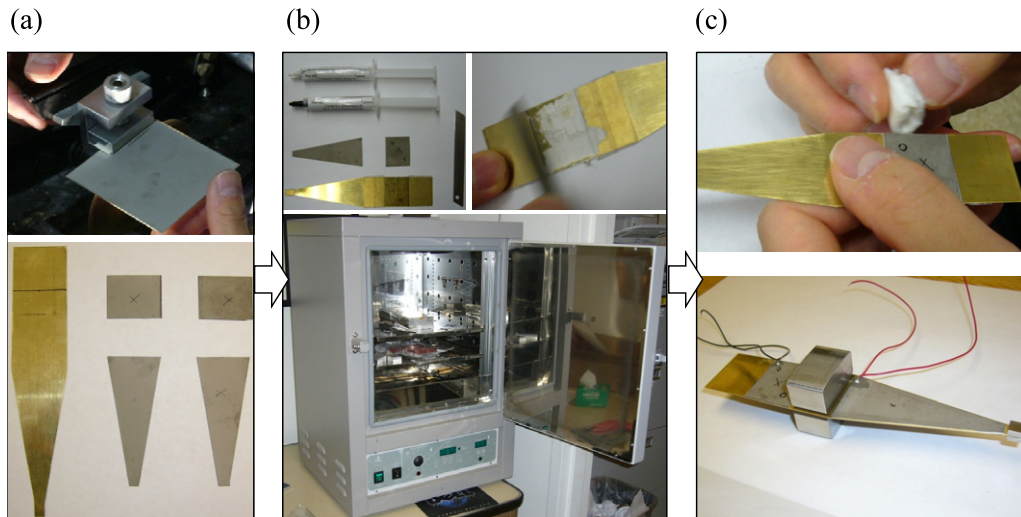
Manufacturing procedure of prototype. (a) Machining, (b) bonding, (c) finishing and assembly.
